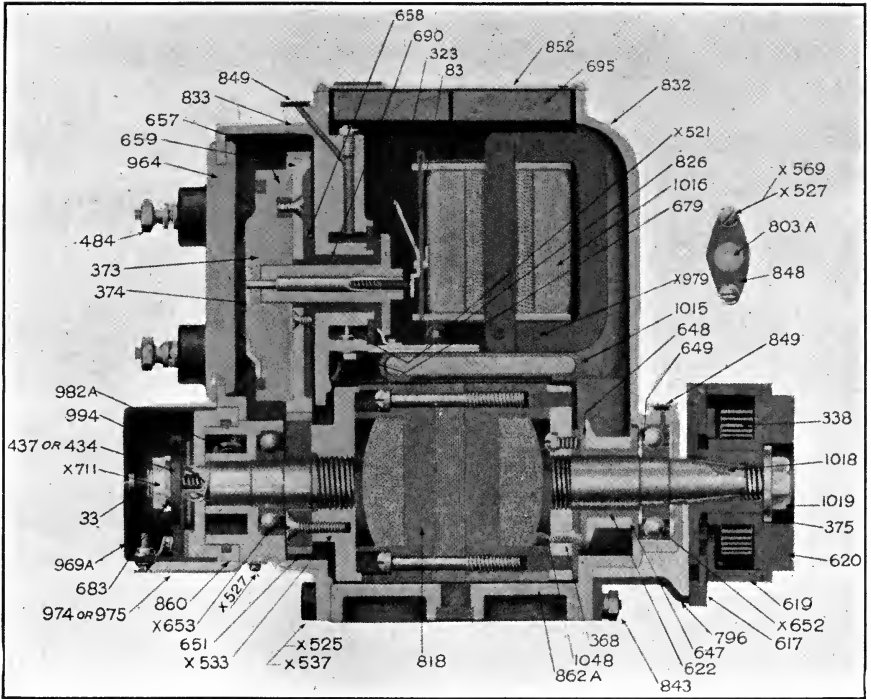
Sectional view of Kingston model O high-tension magneto.
